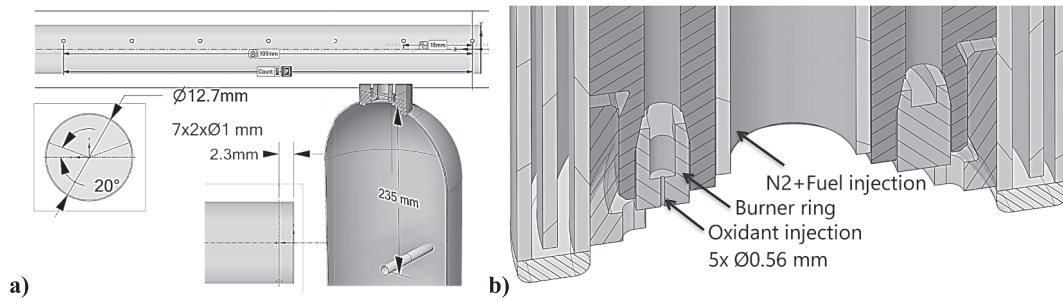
A) the water-cooled burner head with an exchangeable burner ring. b) steam injection tube situated in the reactor core center, 7x2x 1mm injection holes, angled 20° upwards.
